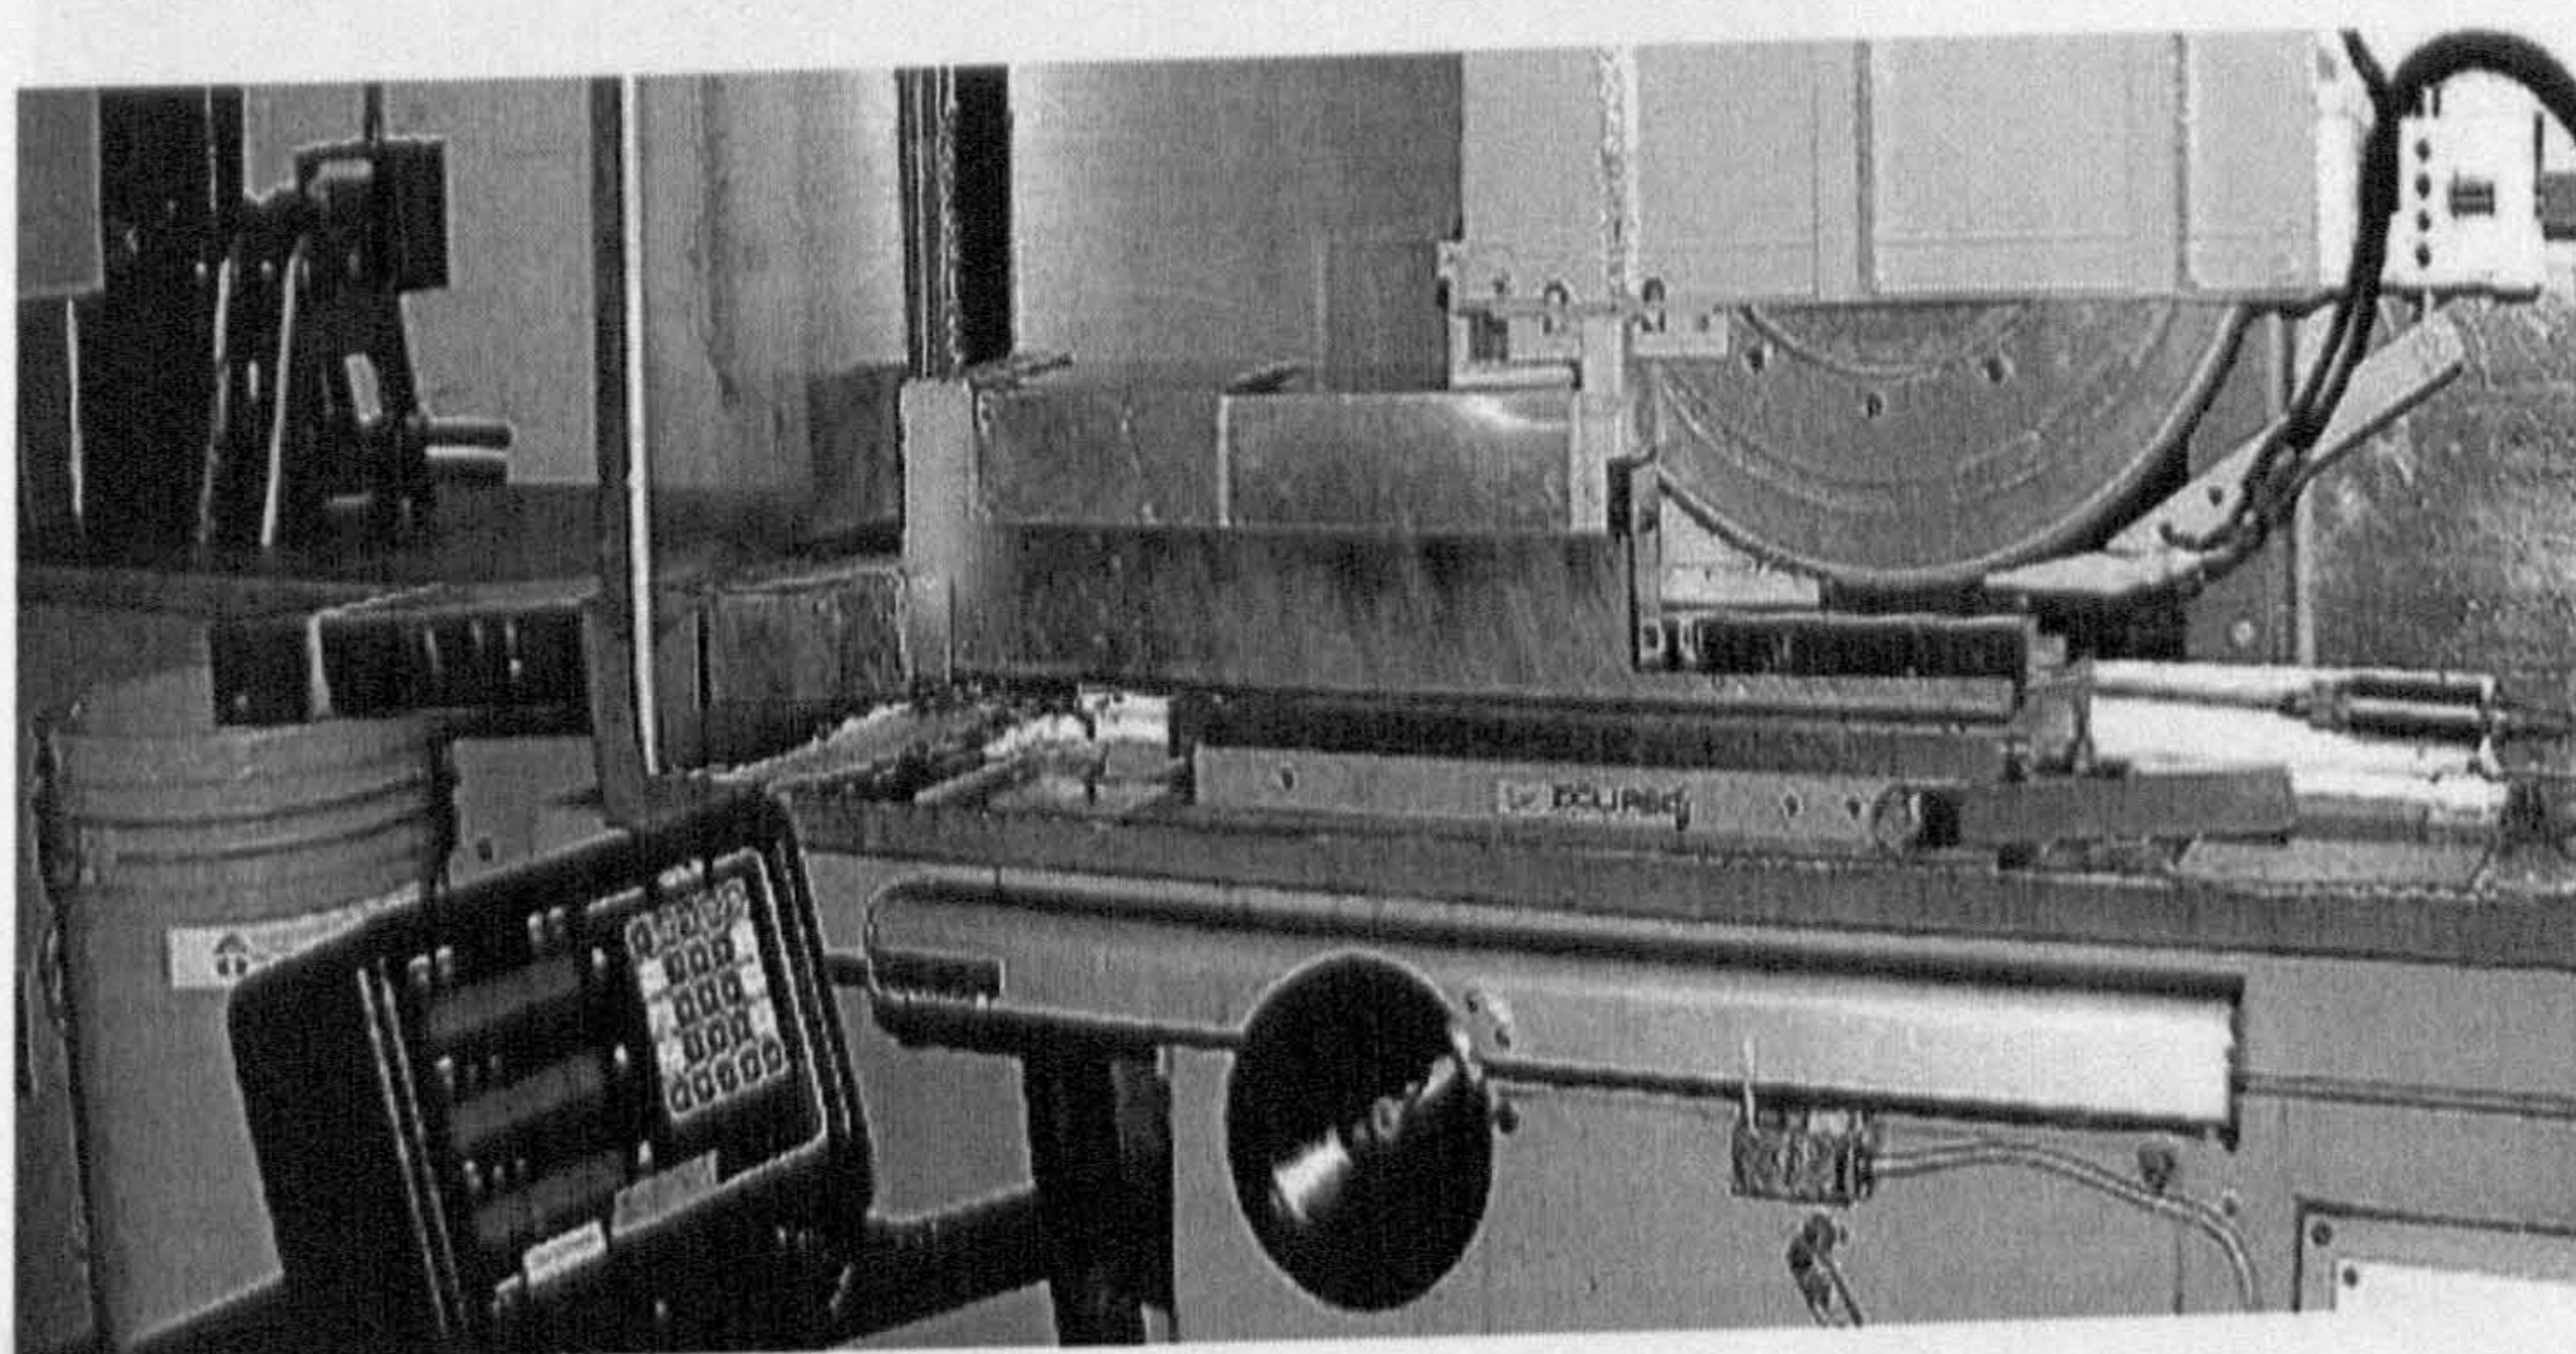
Experimental rig on the Abwood Series 5020 surface grinding machine.
